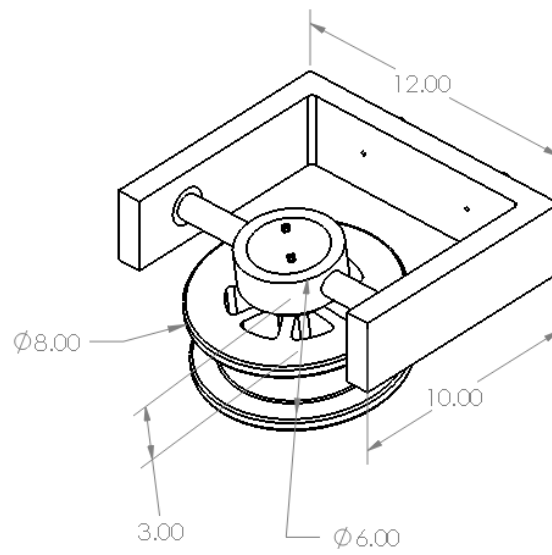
Isometric Drawing of Pulley Wheel and Bracket
